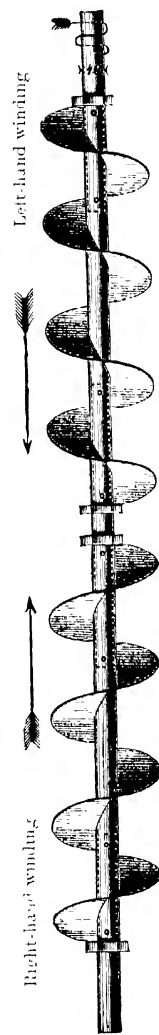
Two spiral conveyors on the same shaft conveying to the same point.
